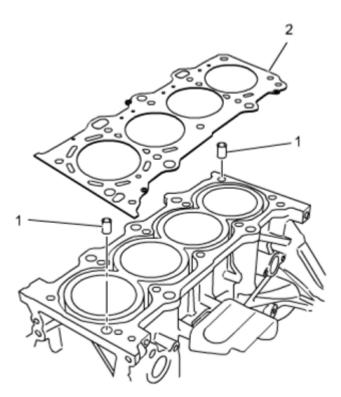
Identifying Cylinder Head Gasket And Dowel Pins Courtesy of SUZUKI OF AMERICA CORP.
